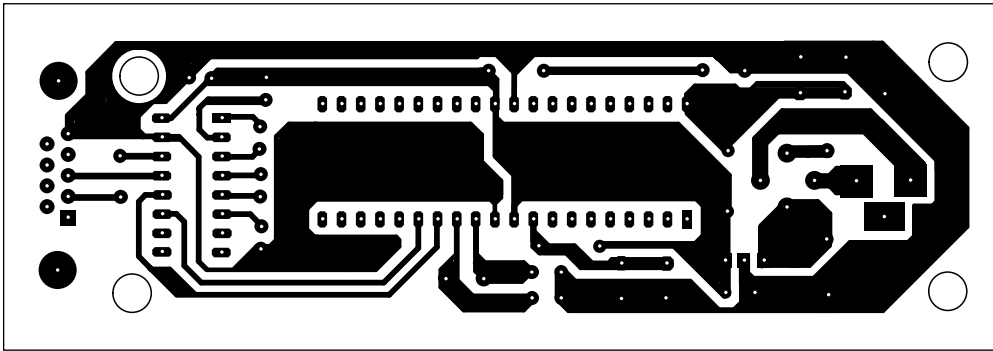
An actual-size, single-side PCB for programming using the bootloader
